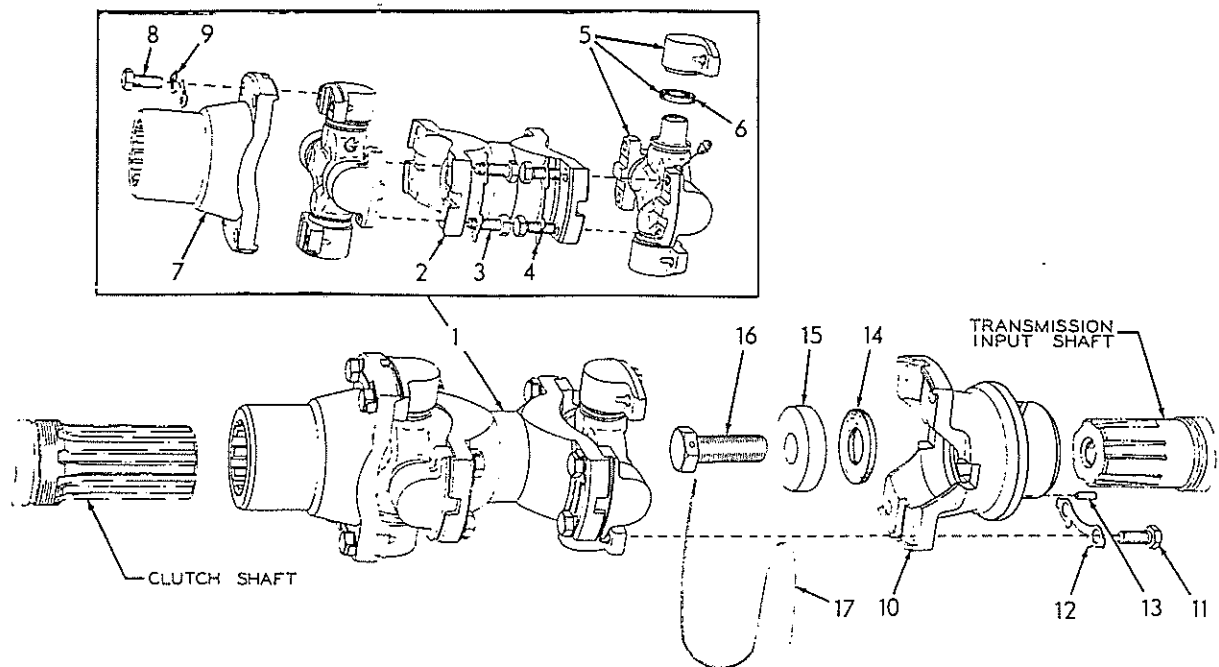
"Mechanics" Universal Joint Assembly (T-14022)
